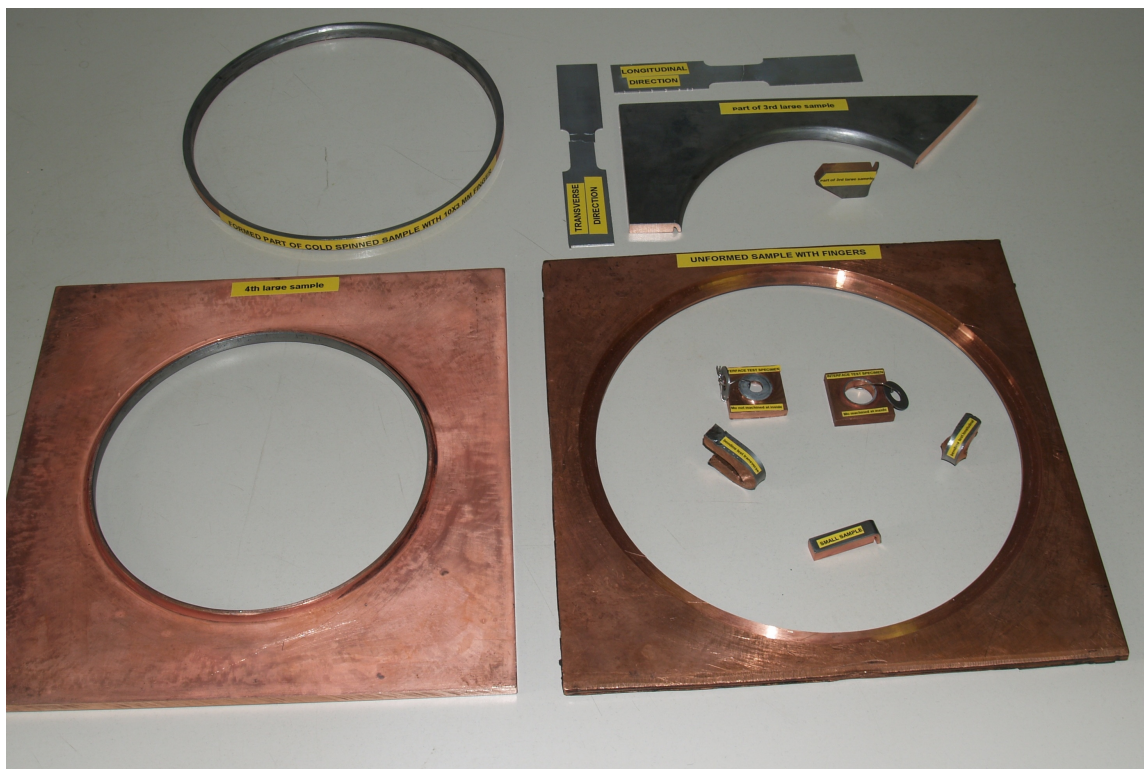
Picture of the Explosion Bonding manufactured prototypes and samples
